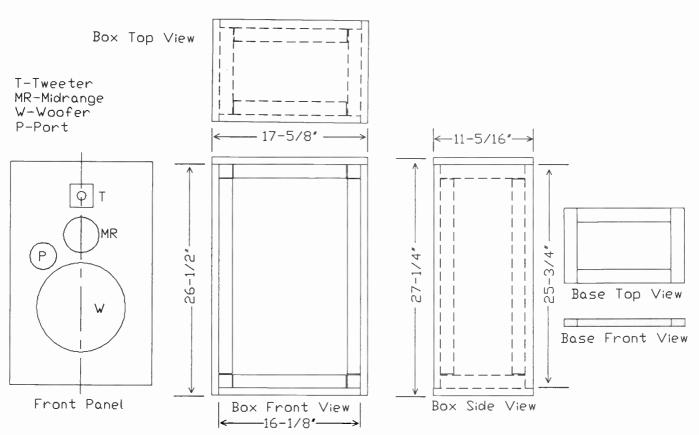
Assembly diagram. Note: rear panel bracing must be recessed 1/10" more than front panel bracing to allow for thickness of weather stripping seai.
